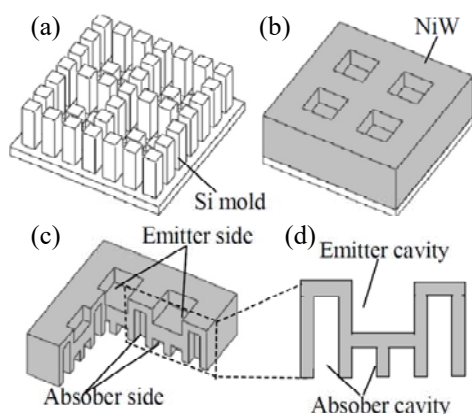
Schematic of fabrication process. (a) Si mold (b) Ni-W electroplating (c) Demolding (d) Cross-section.
